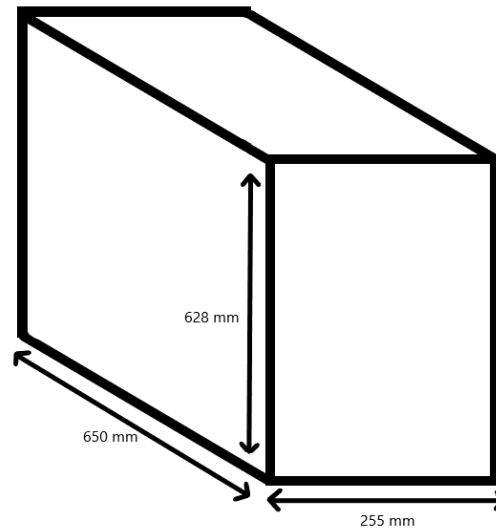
Sketch Of The Maximum Dimensions Of The Mounting Mechanism.
